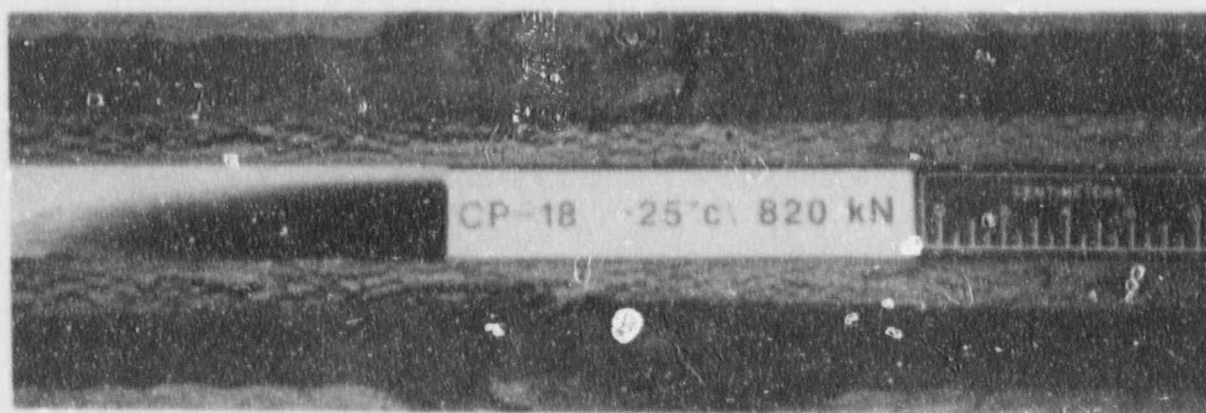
Fracture surface of clad plate CP-18. Note the similarity to the fracture surface of clad plate CP-19 shown in Fig. 4.13(a).
